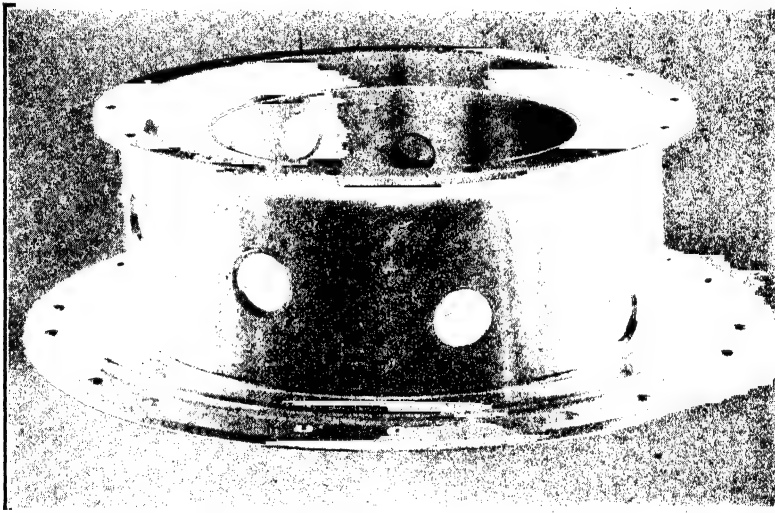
The Gnome Engine Alloy Steel Cam Gearcase was a Fine Example of Accurate but Expensive Machine Work, as it was Produced from a Heavy Forging. Corresponding Parts of Modern Engines Would be Made of Duraluminum.
